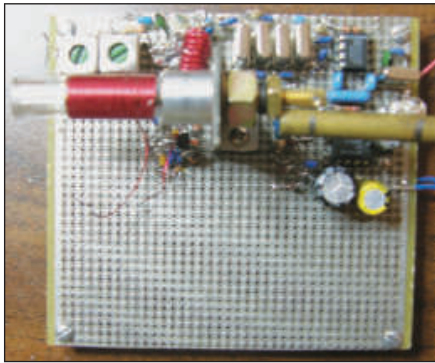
Detailed view of the VFO assembly before installation into the receiver.
